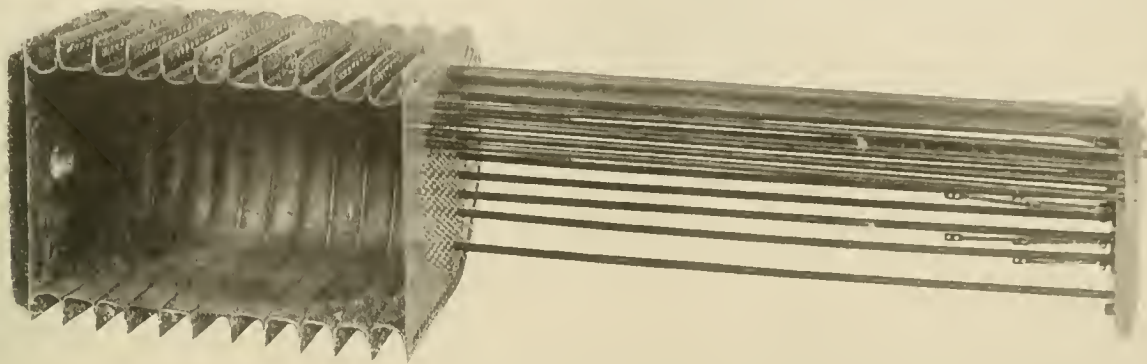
BOTTOM VIEW OF FIREBOX WITHOUT MUDRING OR OUTSIDE SHEETS.
